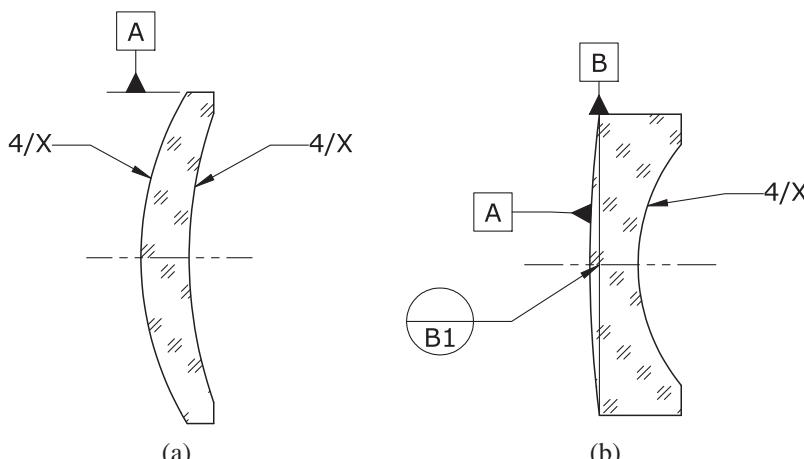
Example optical element showing the definition for the outer cylindrical surface (outer diameter) for an optical element with (a) two centering tolerances and (b) two datum and a single centering tolerance.
